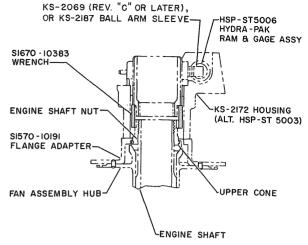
Use of Special Tools on Clutch Shaft Nut
